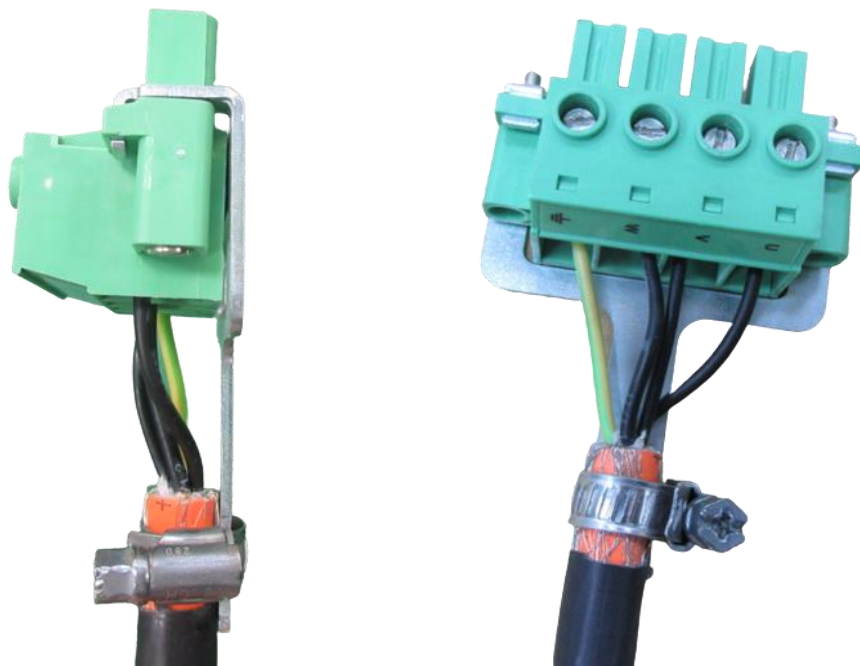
Use a tube ring to fix the shield on shield connecting plate (Schematic)
